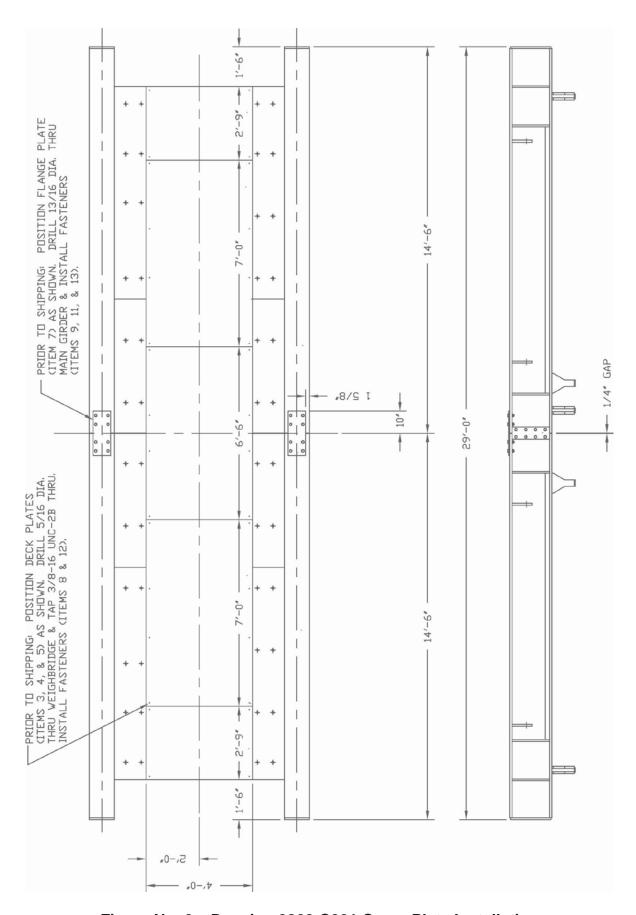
Drawing 0862-C001 Cover Plate Installation
